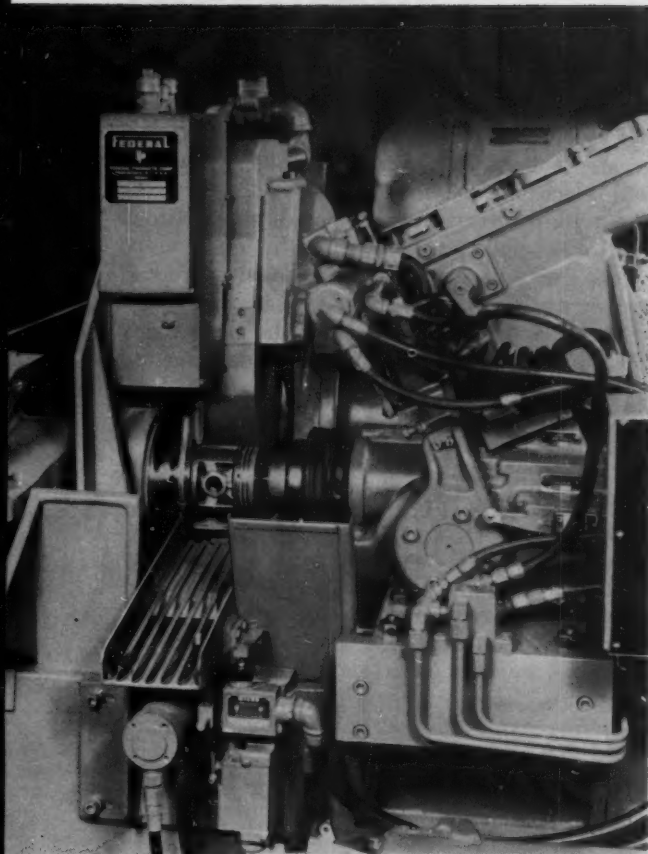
A piston is cam-ground on a machine equipped with an electronic in-process gage. This type of gaging provides the necessary speed of response required for the operation.
